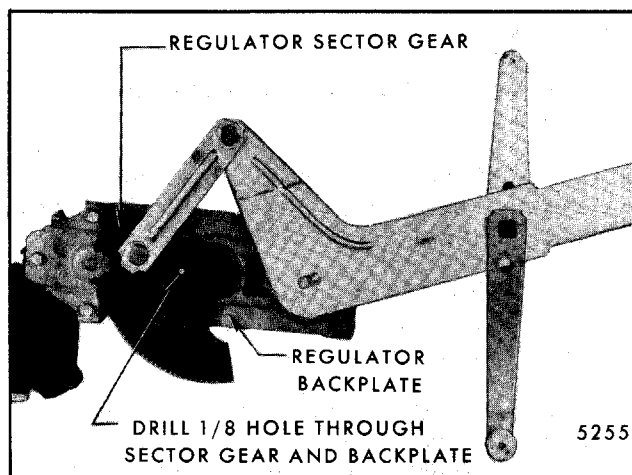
Tailgate Window Regulator Motor Removal
